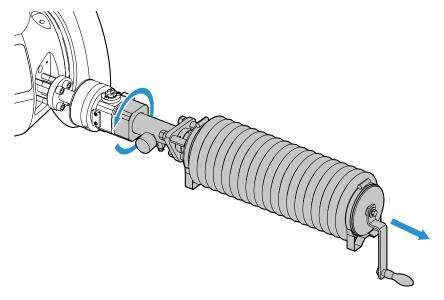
Dismounting the spindle assembly from the ball valve assembly
